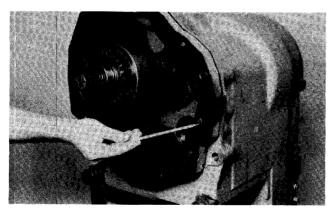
Install housing spacer, gasket and "O" ring seals. NOTE: Housing spacer is used with 12 plate clutch modulation only.
